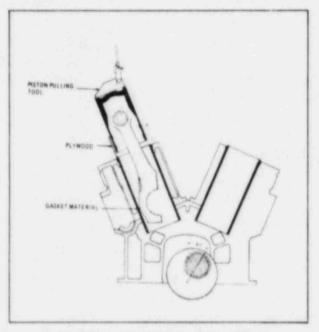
C-6. Lifting Master Rod and Piston From Cylinder Liner.
